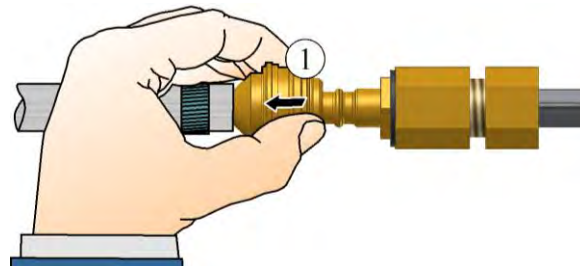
Disconnect the coupling socket from the quick coupling (similar to picture)
